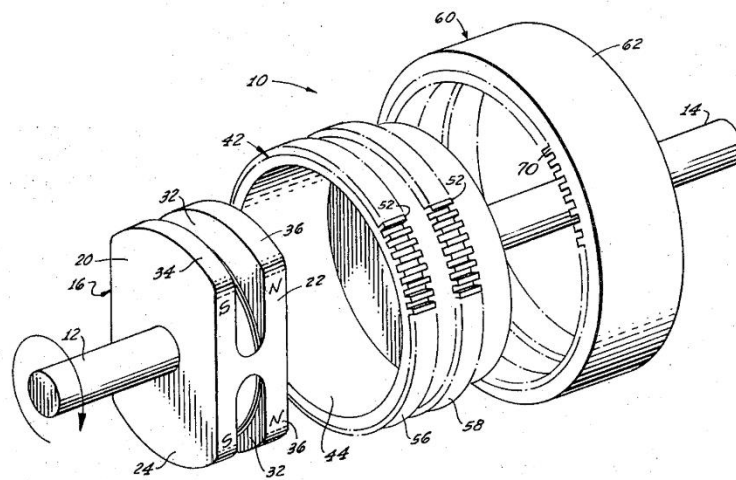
Coaxial magnetic gear by Reese[5]
